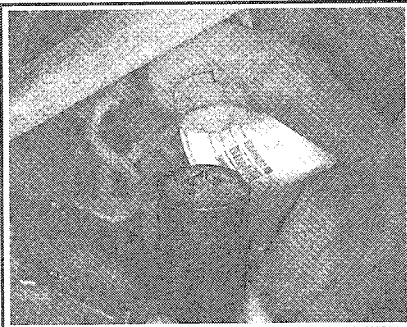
A large deepwell socket, typically 1 5/16 in., is needed to remove the pitman arm retaining nut
